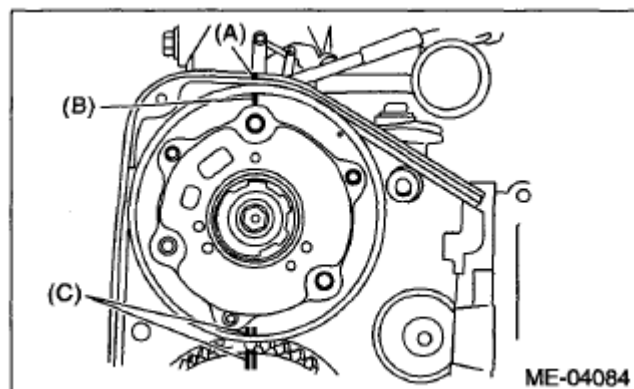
Identifying Double Line Marks On Intake And Exhaust Cam Sprockets
